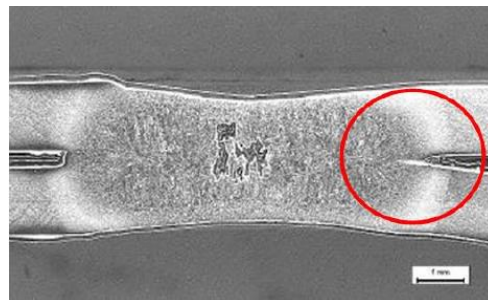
Example of a Notched Spot Weld Nugget
